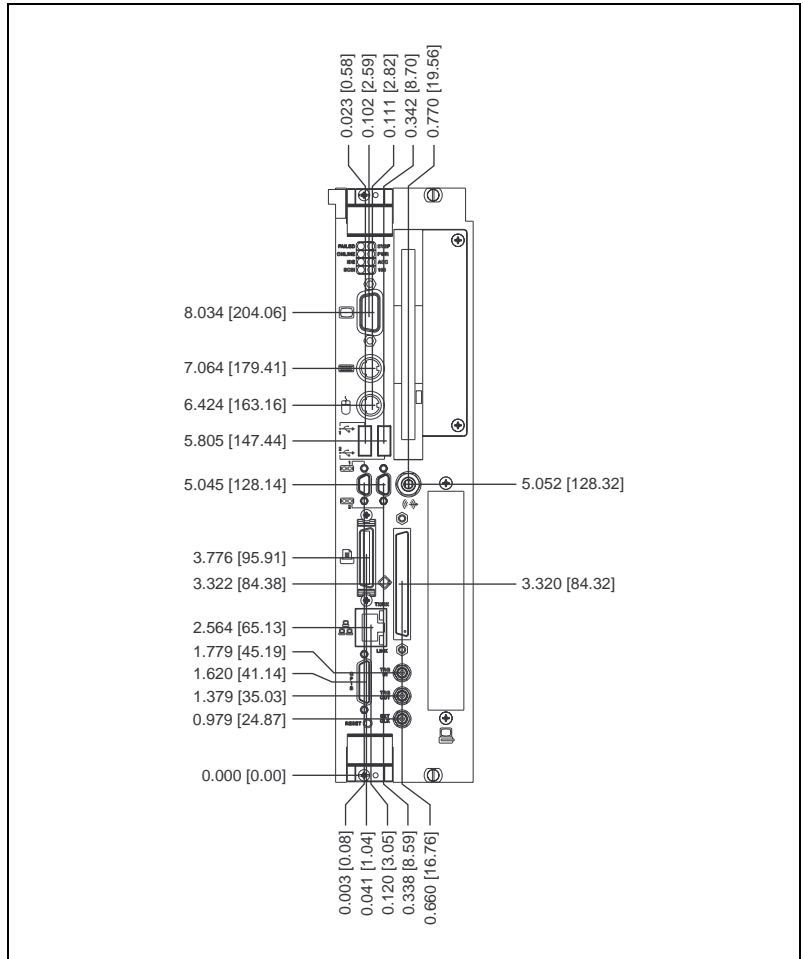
VXIpc-872 Front Panel Layout and Dimensions
